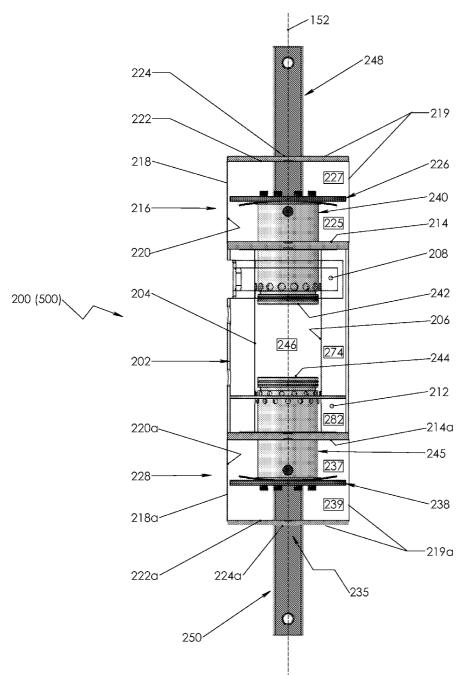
ENGINE HYDRAULIC ASSEMBLY
